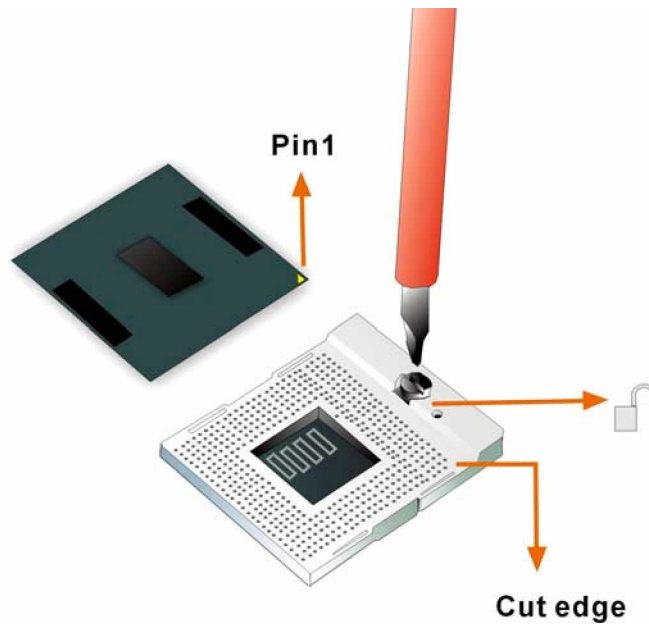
Make sure the CPU socket retention screw is unlocked
